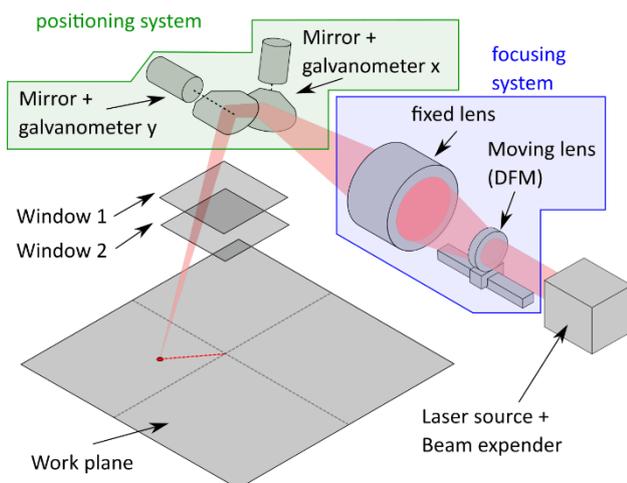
Opto-mechanical chain of an additive manufacturing machine by laser powder bed fusion. Post-objective focusing system.
